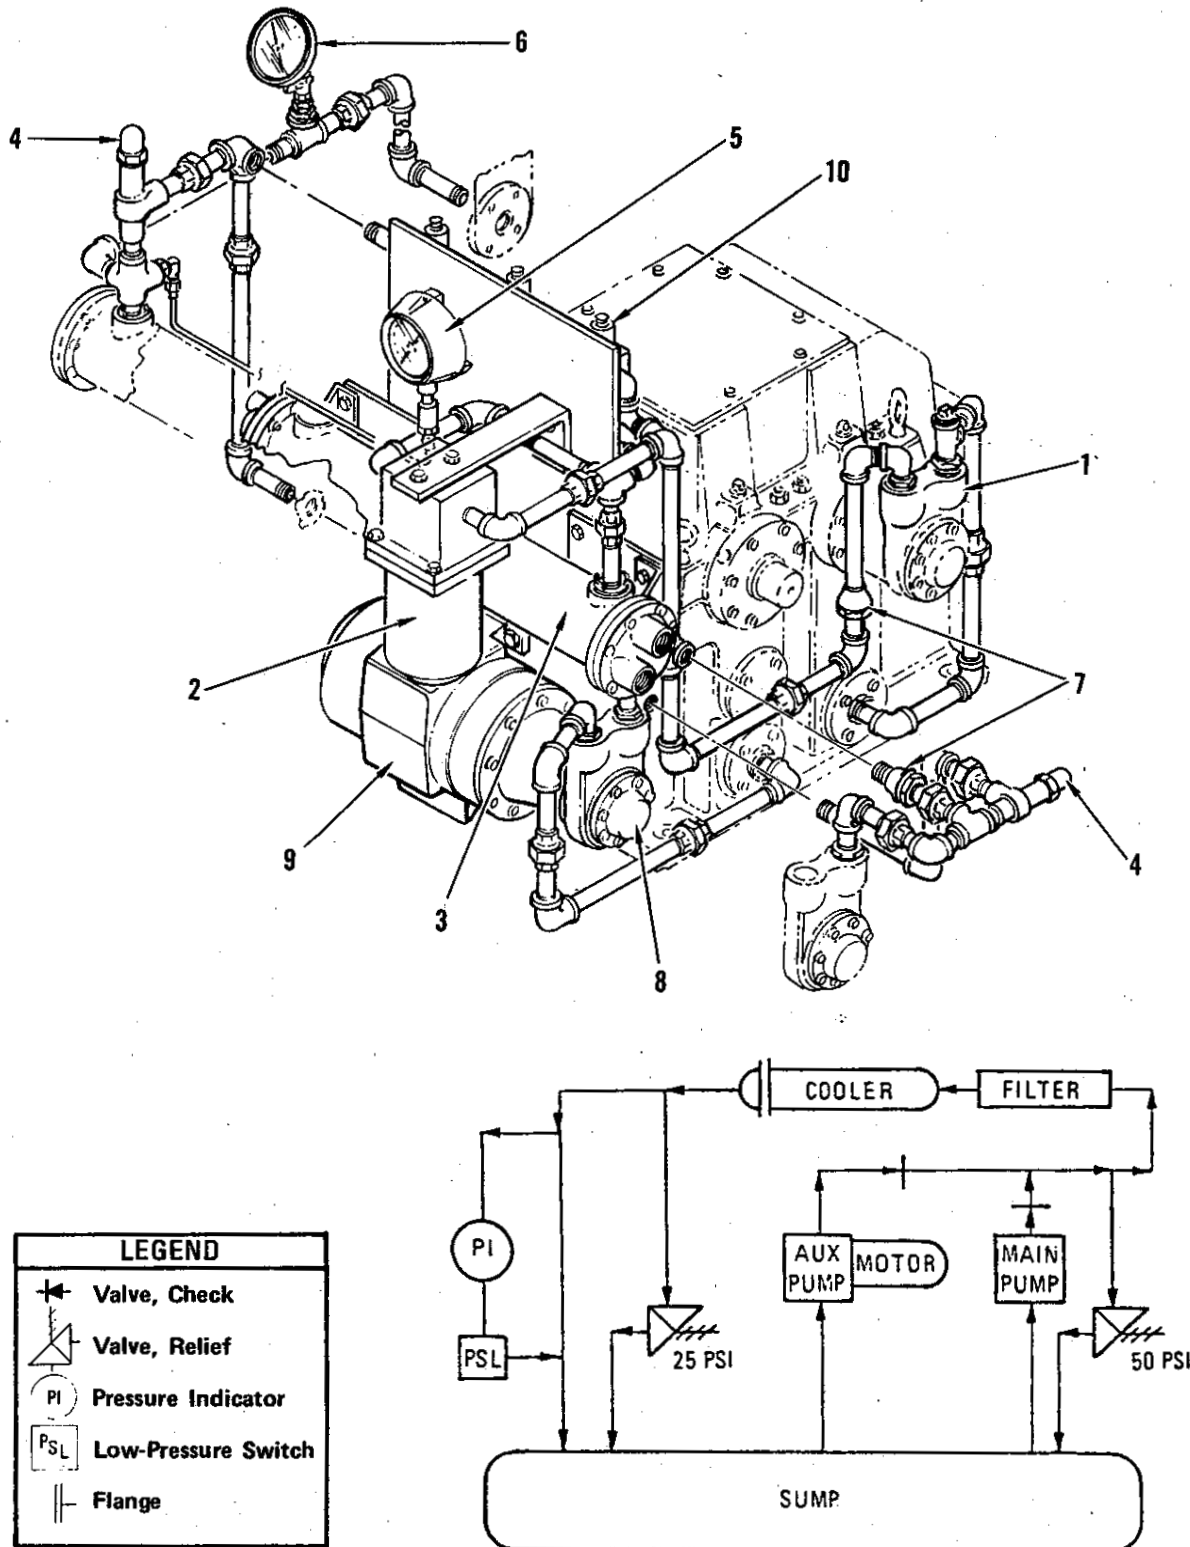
Panel Mounted Auxiliary Lubrication System.
